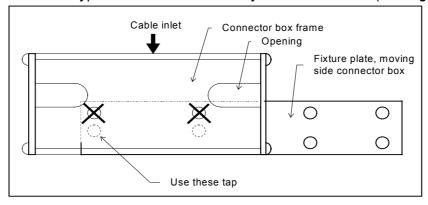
B type combination: Assembly of connector box (moving side) and fixture plate
